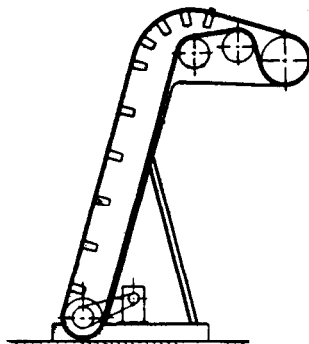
MAGNETIC ELEVATOR/CONVEYOR
